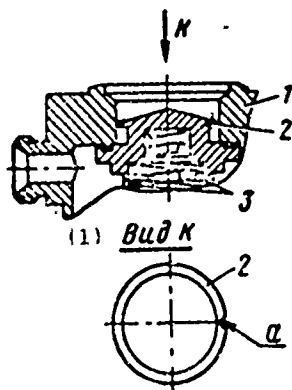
An element of a propellant valve design: 1 - housing; 2 - head of the valve disk; 3 - spring; a - break end collar.
